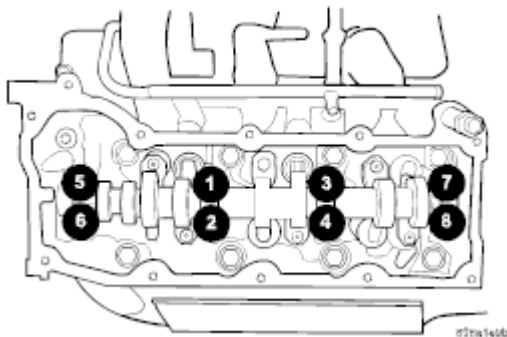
Identifying Installation Sequence Of Camshaft Bearing Cap Bolts
